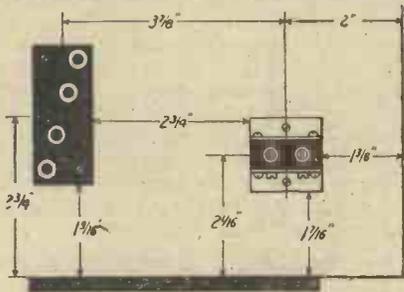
To avoid stray coil coupling the coil sockets should be fixed to the baseboard according to these dimensions.
